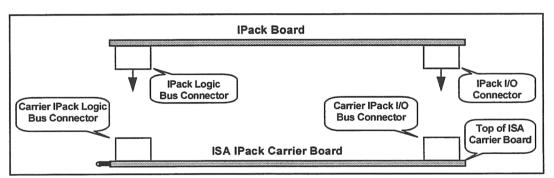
Installation of the LOW40 on a ISA IPack carrier board.
